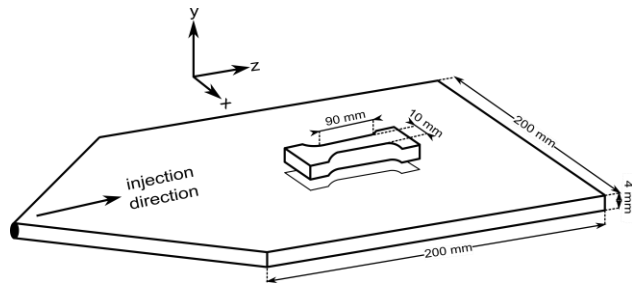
Geometry of the tensile test specimen machined out from an injection-molded plate.
